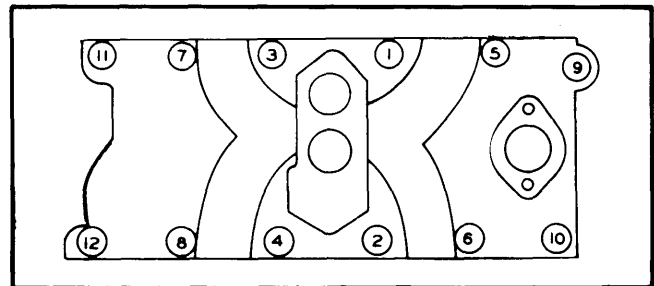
318" & 360" Engine Intake Manifold Tightening Sequence
